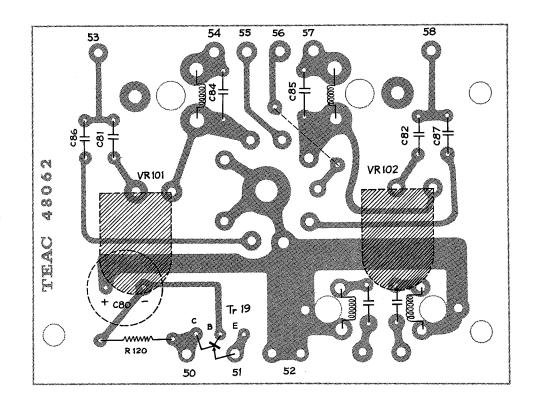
RECORD OUTPUT PRINTED CIRCUIT BOARD
